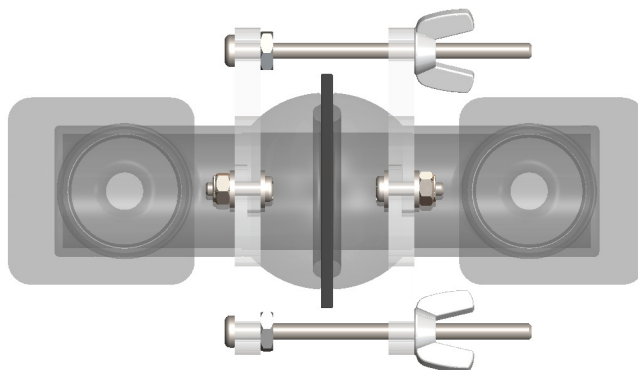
Fully Assembled Variable Thickness Clamp with Separator Material Secured Between Cell Halves
